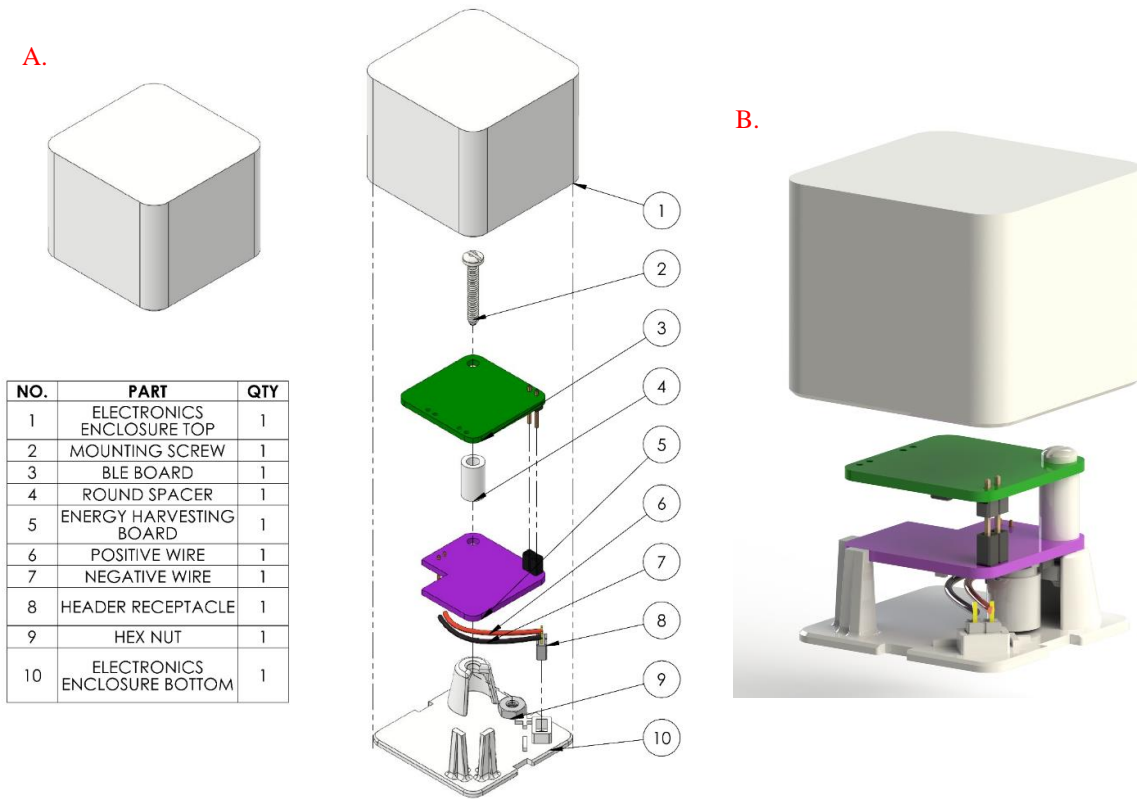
Electronics enclosure design. A) exploded view of electronics packaging, B) assembled with lid raised
